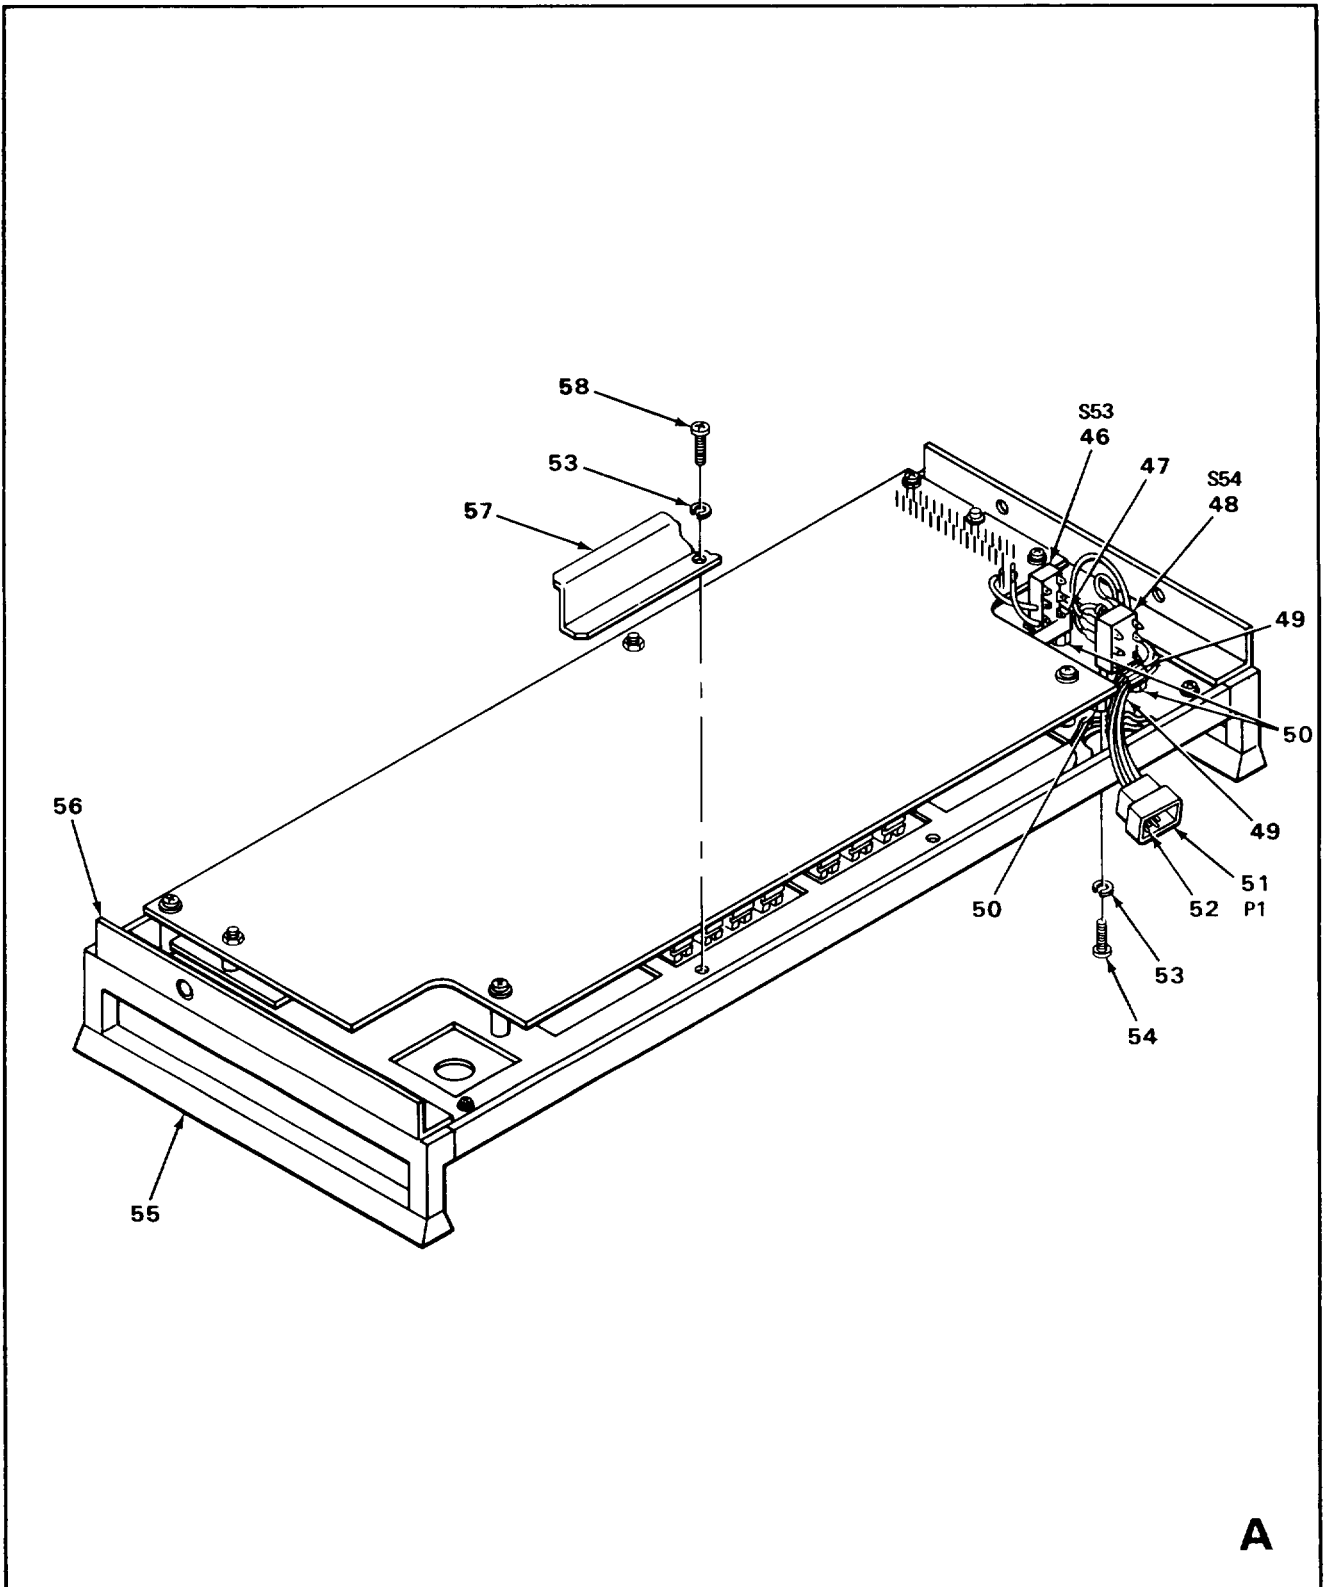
FRONT PANEL ASSEMBLY A1 (SHEET 1 OF 2).
